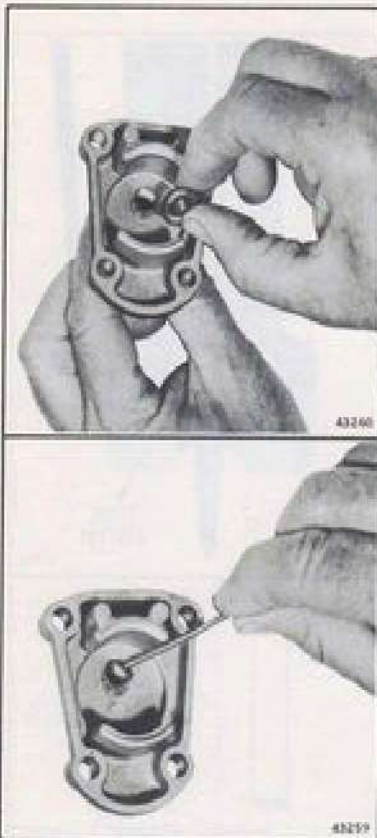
Removing Shift Rod Bushing "O" Ring
